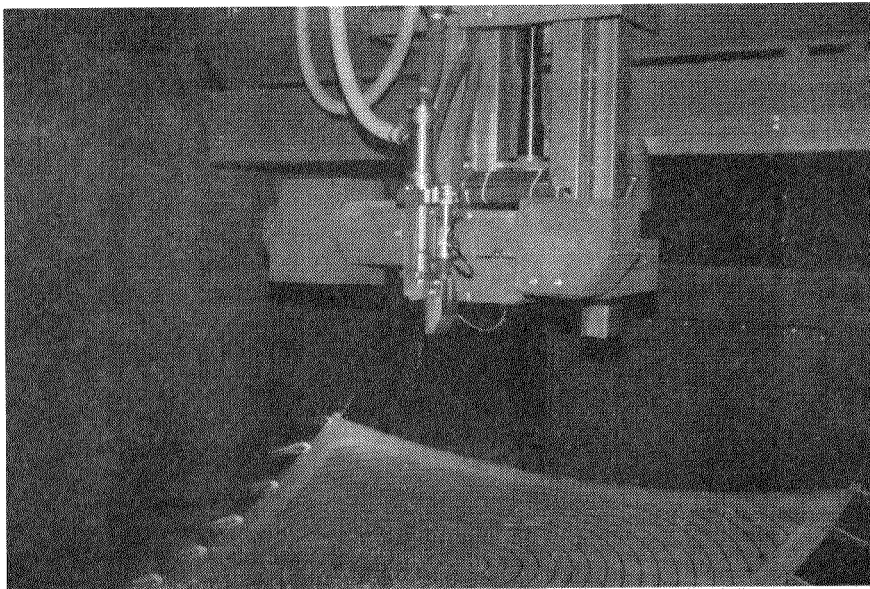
Inclined Rotary Table with Workpiece during Peen-Forming-Operation
